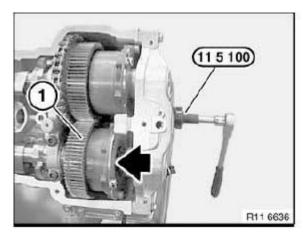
Identifying Special Tool 11 5 100 Courtesy of BMW OF NORTH AMERICA, INC.
